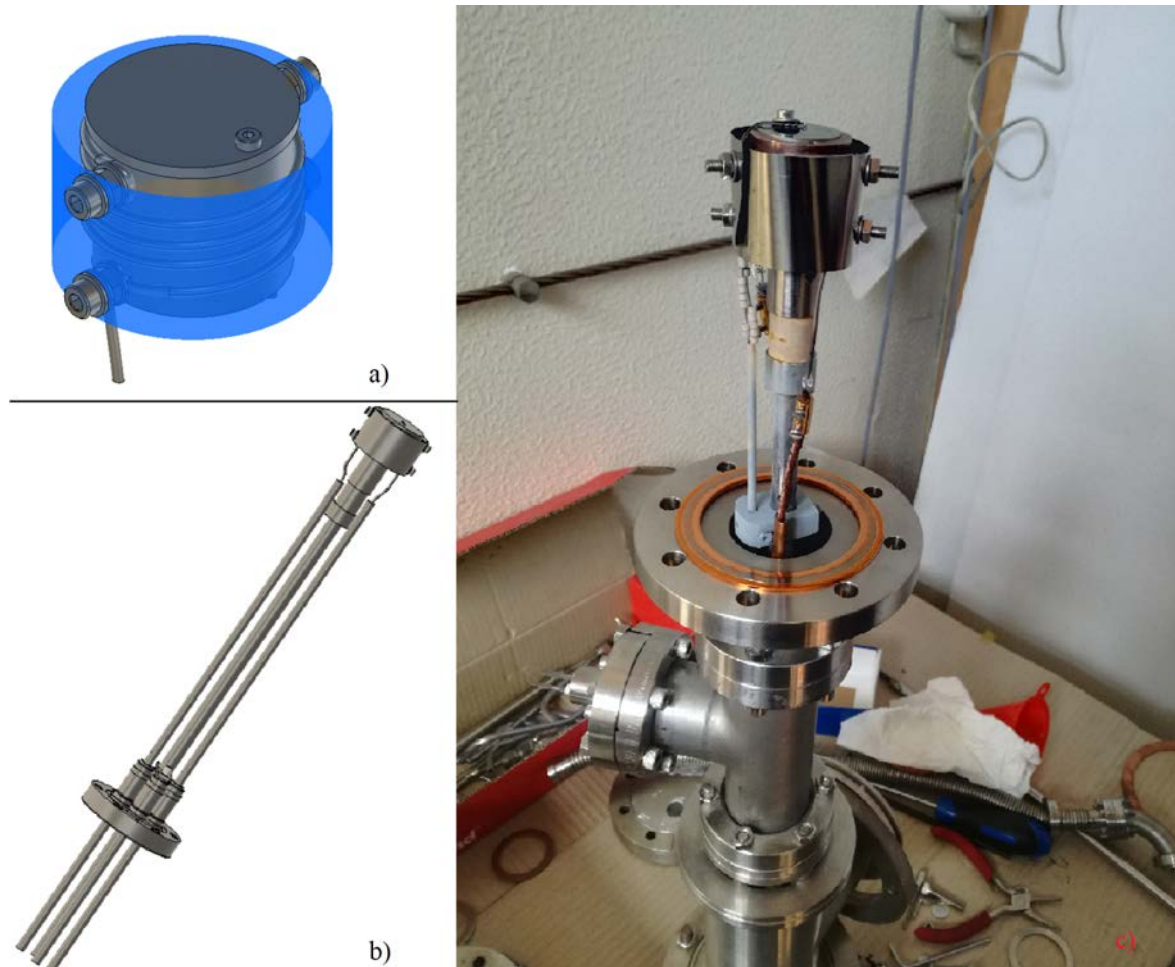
a) Heater drawing and SS shield (blu); b) Heater mounted on the power-feedthrough drawing; c) Picture of the heater mounted in the bottom part of the set-up
